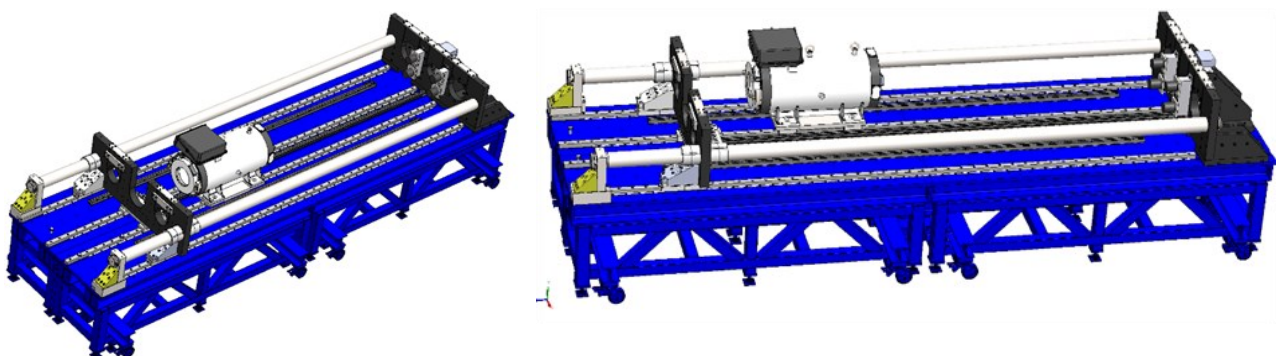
Rotary motor mounted inside the rig: on the central rails (left) and on side rails (right).
